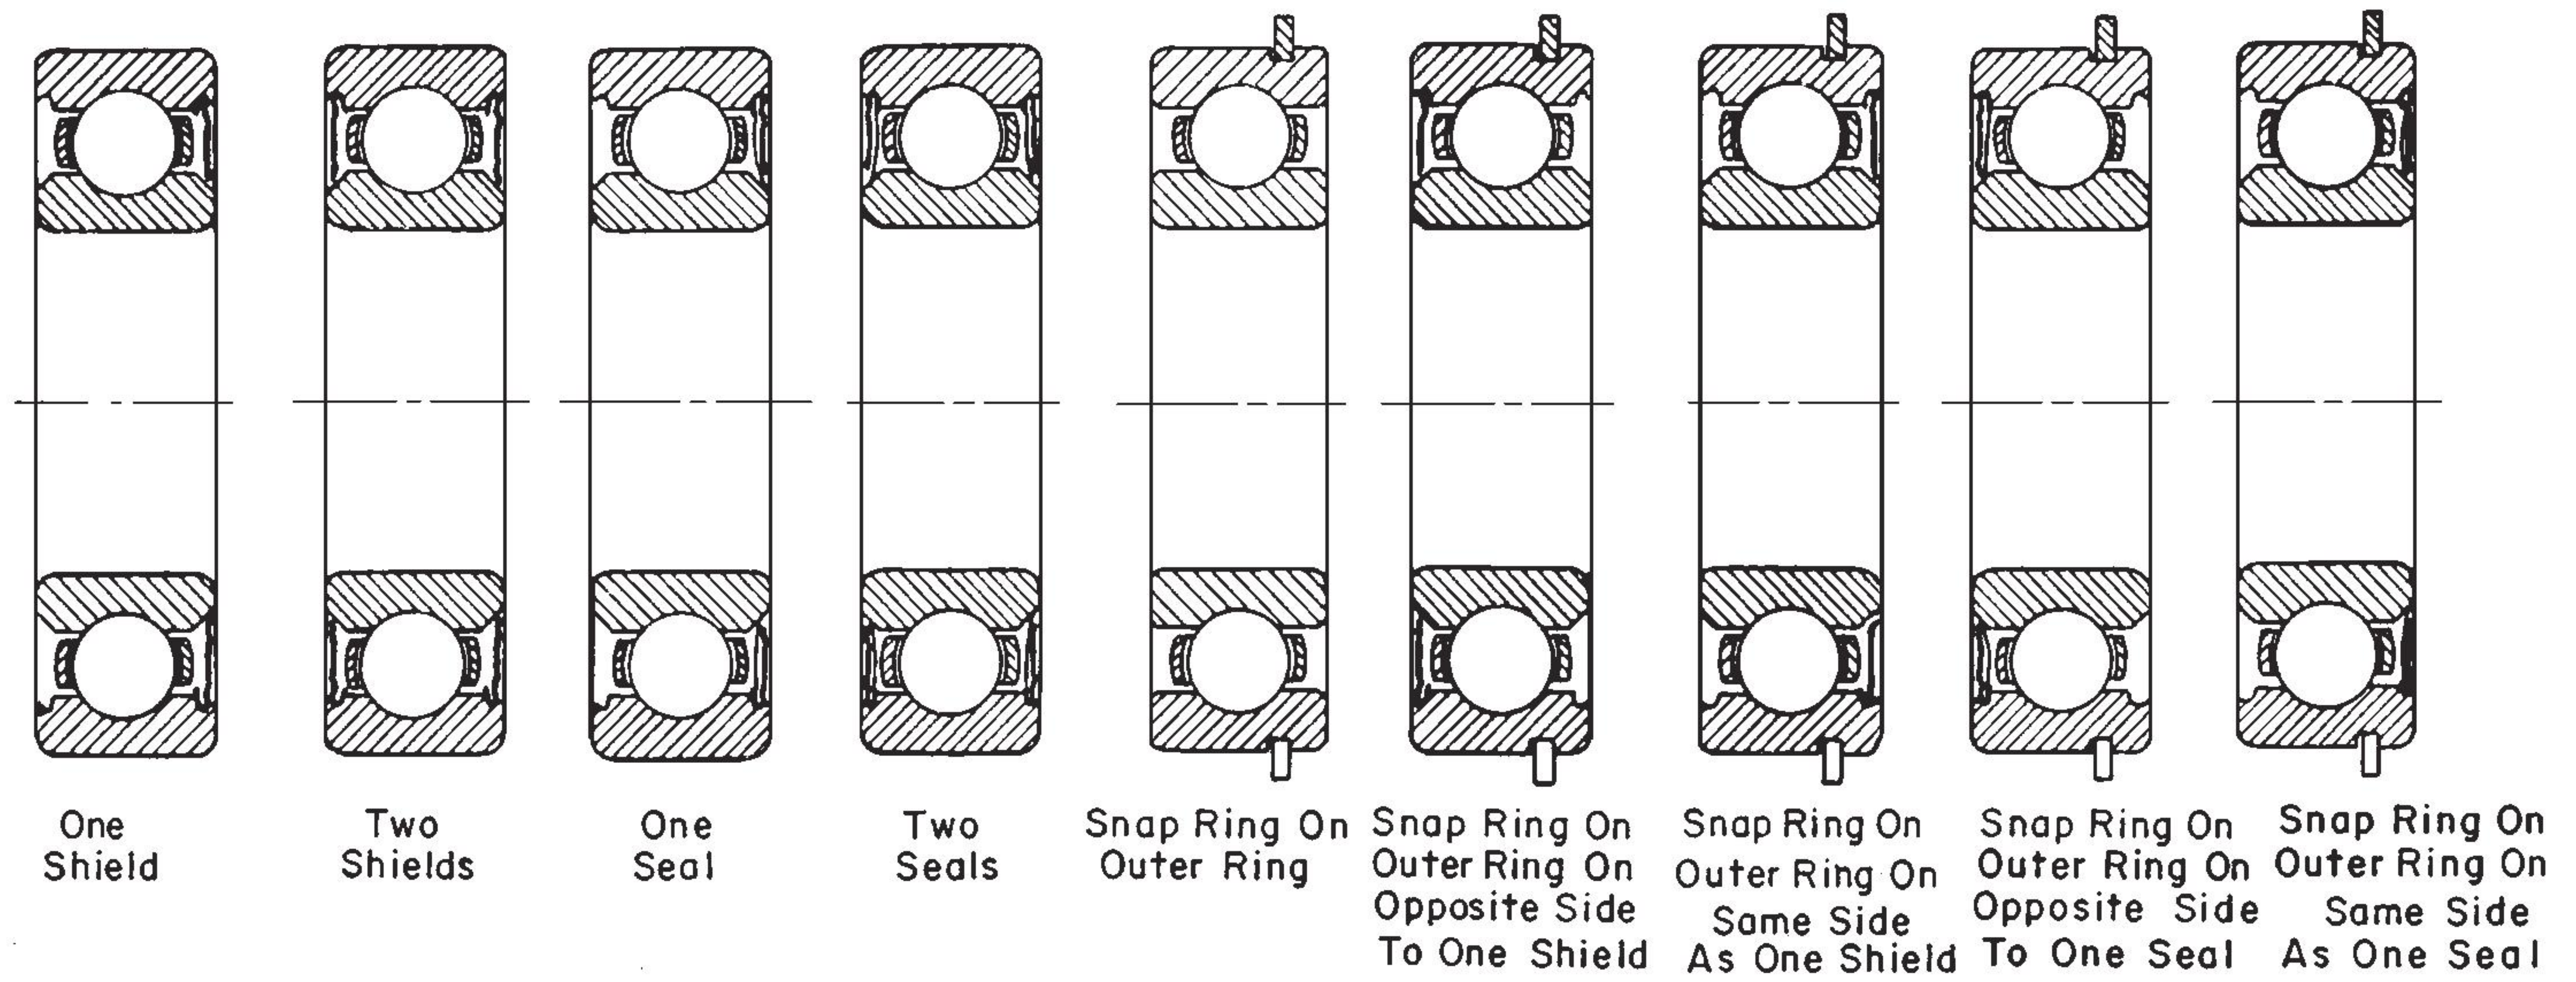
Single-row deep-groove ball-bearing shields, seals, and snap rings.
